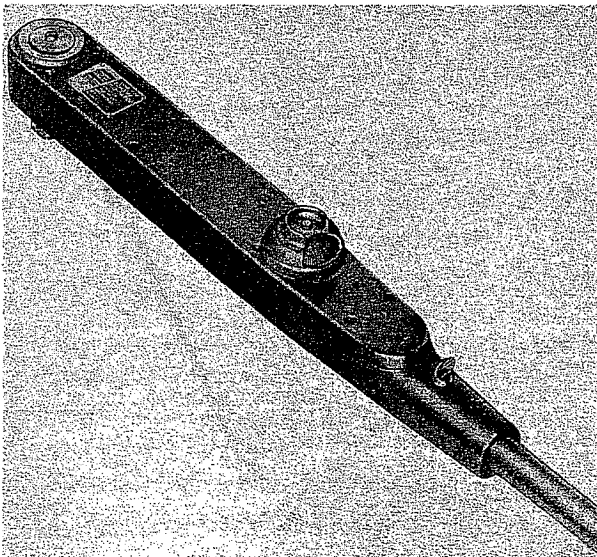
Some torque wrenches have a ratchet drive. (Ammco Tools, Inc.)
